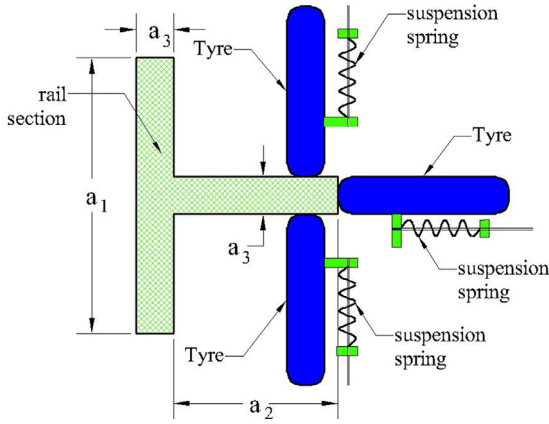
Roller guide arrangement consisting of a suspension-tyre system and a guide rail section.
